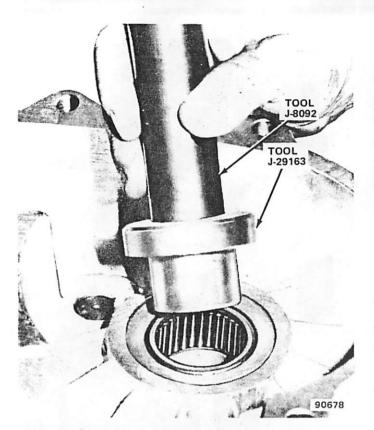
D-30 Front Output Shaft Rear Bearing Installation
